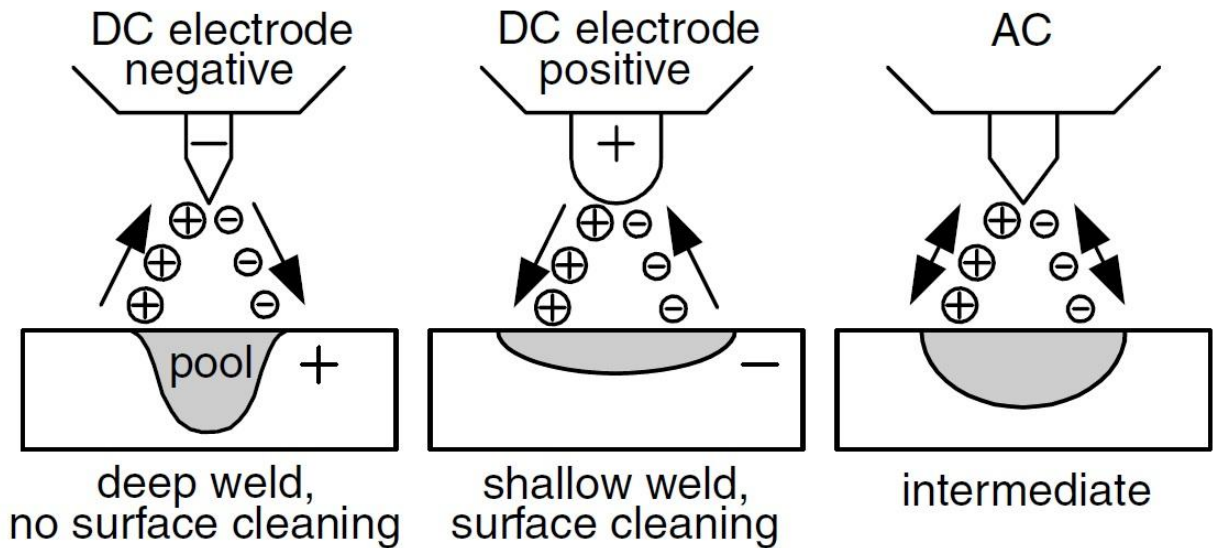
Different polarities in TIG welding (Sindo kou, Welding metallurgy)
